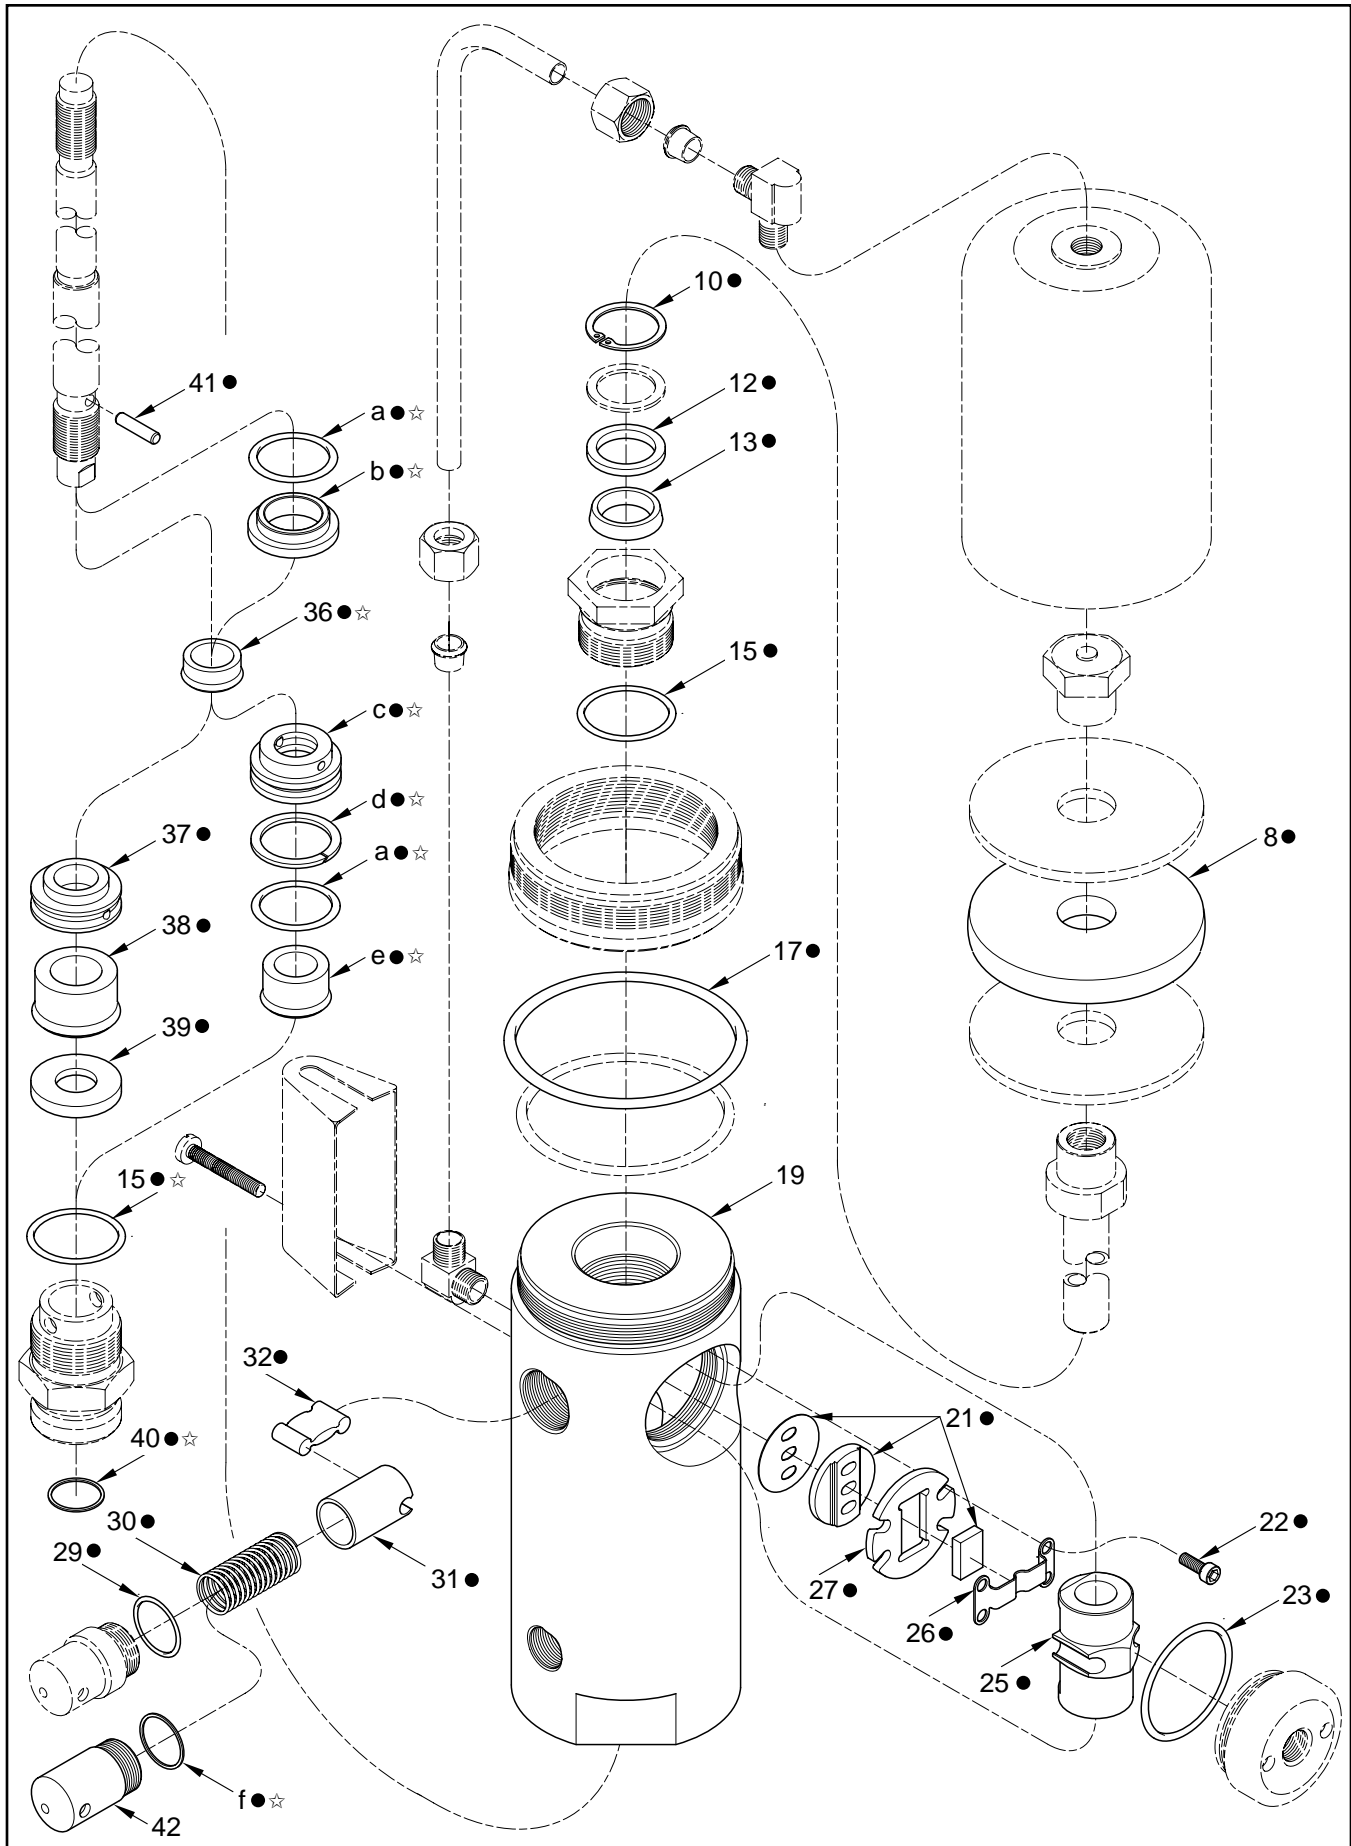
Additional Kits for Air Motor Model 324400 Series- Exploded View
